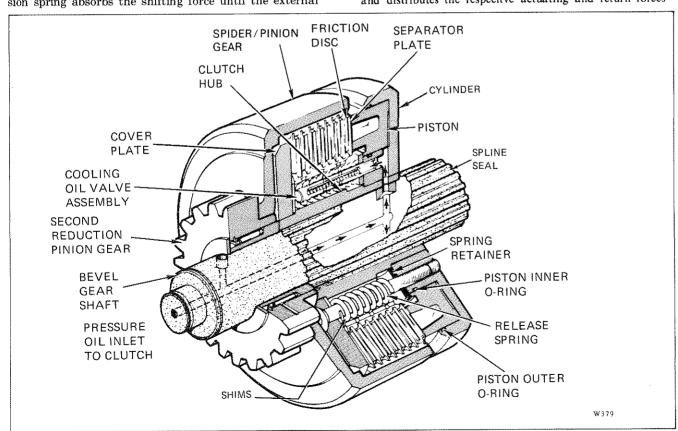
OIL CLUTCH ASSEMBLY, POWER CONTROLLED WINCH
